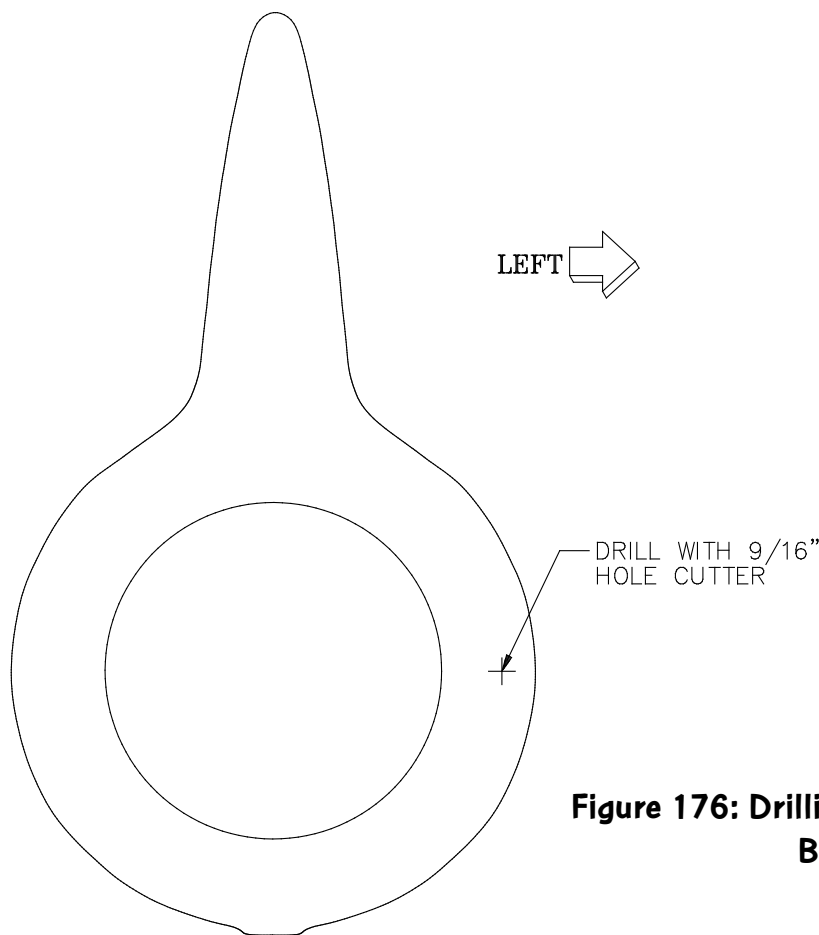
Drilling the Trim Cable Hole in Bulkhead B
